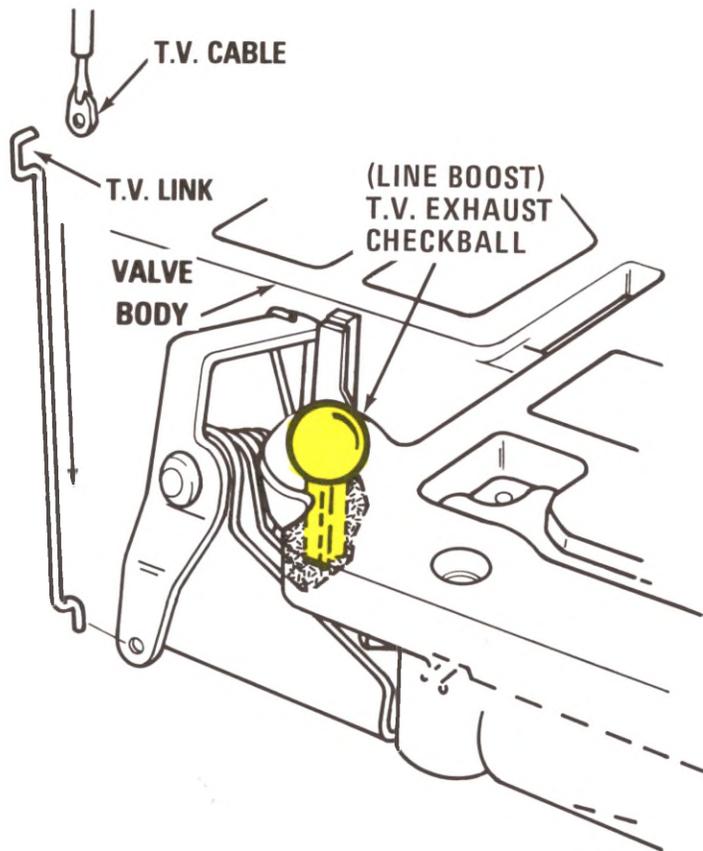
Accelerator, Carburetor and T.V. Linkage
